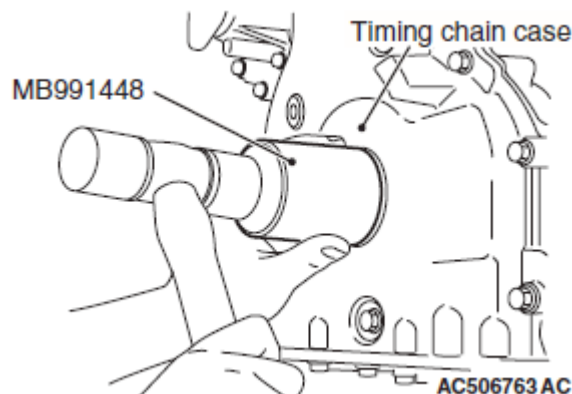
Pressing Crankshaft Front Oil Seal Using Special Tool MB991448
